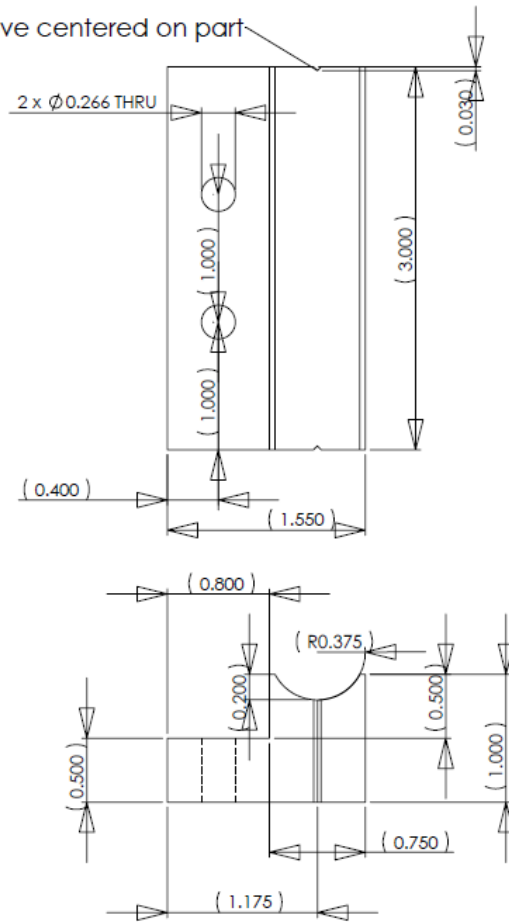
Roller mount for 0.75 in diameter roller (dimensions in inches, material: aluminum)
